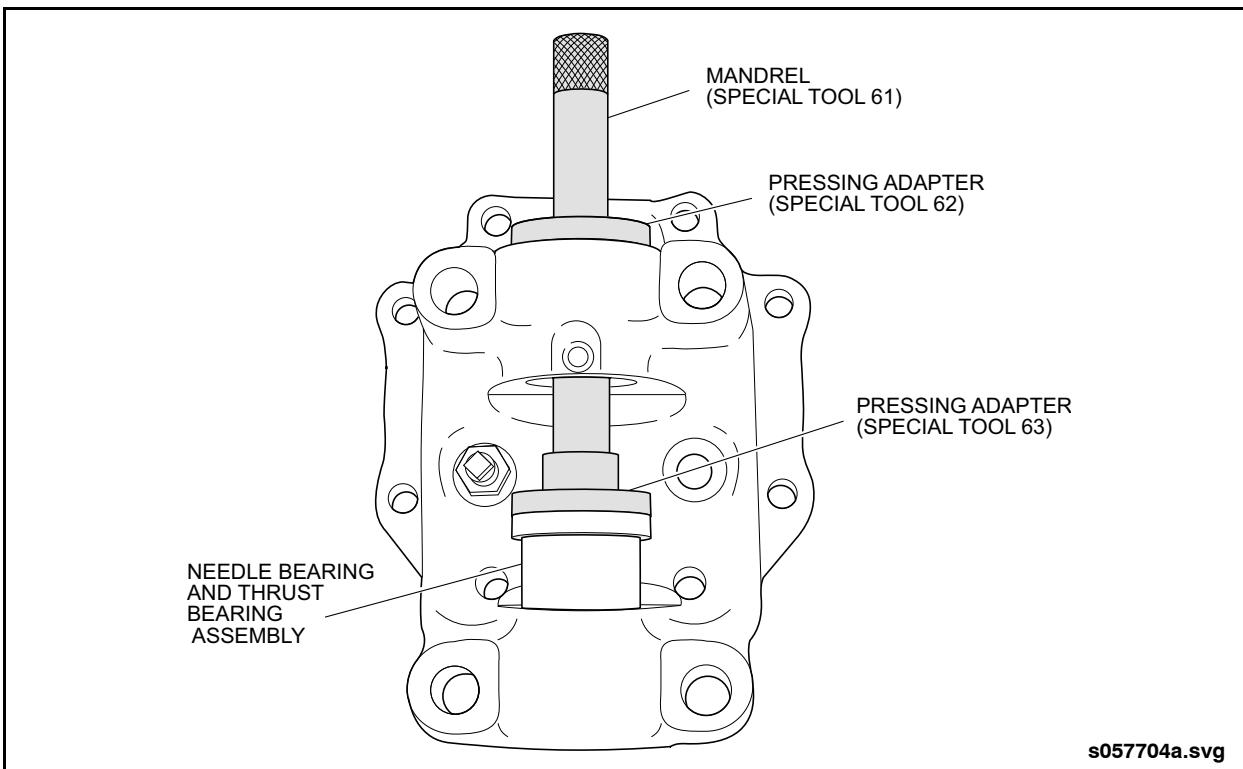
King Pin Needle & Thrust Bearing Installation
